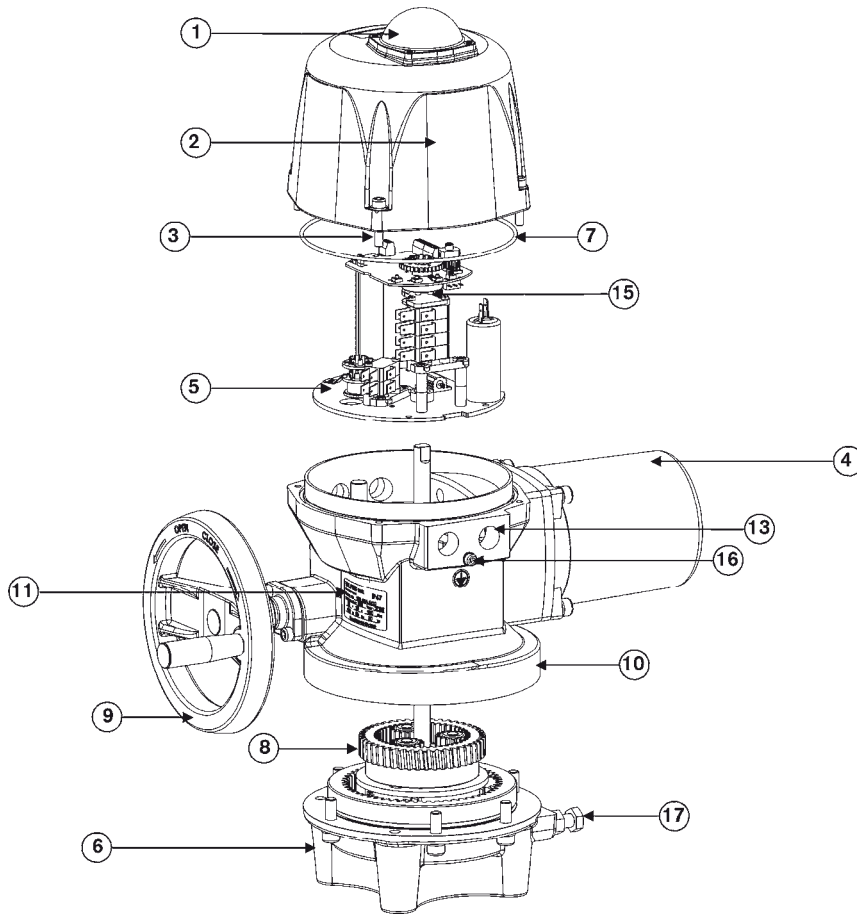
Exploded view of motor 600 - 1 000 Nm
